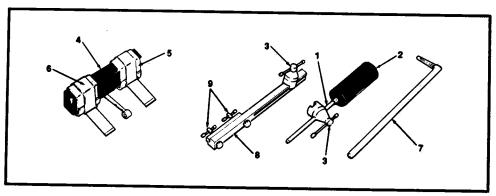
ARM TRACTION ASSEMBLY (BF00-007).
